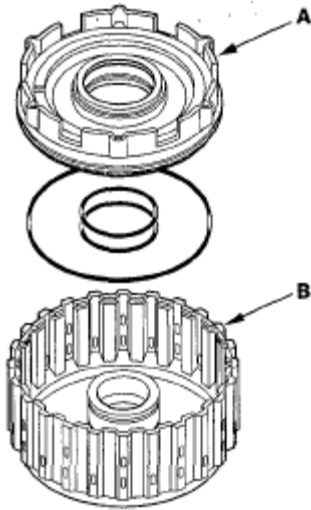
Identifying 1st/1st-Hold Clutch Piston And Clutch Drum
